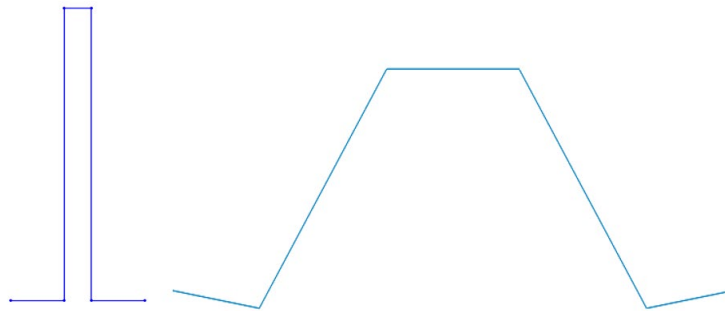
Blade (left) and Hat (right) Stiffener Cross-section Geometry
